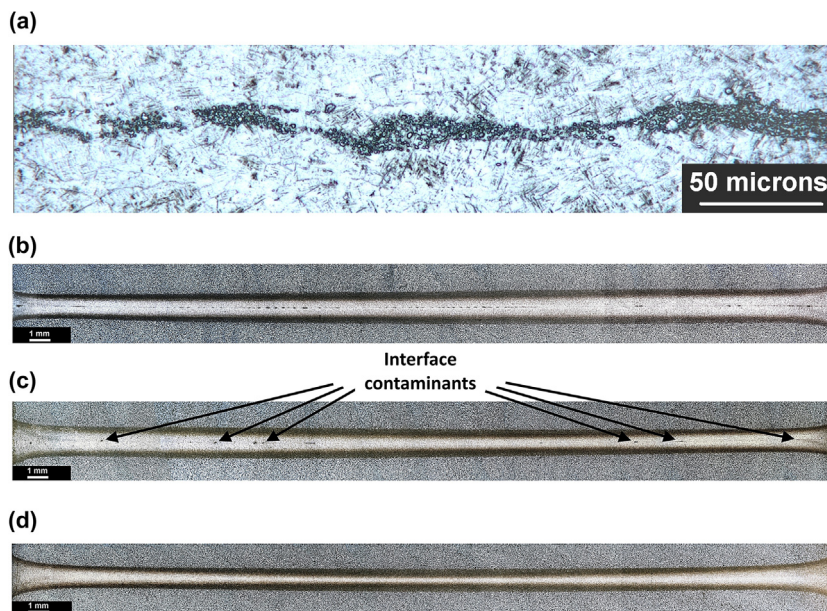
(a) High magnification of the contaminants present at the weld interface of a Ti-6Al-4V weld, (b) contaminants after 0.5 mm of burn-off, (c) contaminants being expelled toward the edges after 1 mm of burn-off, and (d) no contaminants after 3 mm of burn-off [14].
